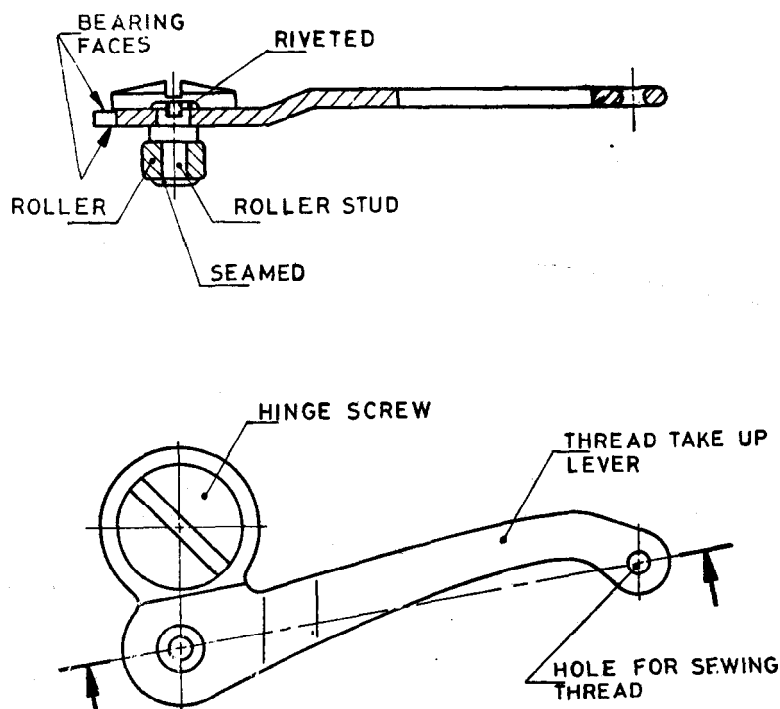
NOMENCLATURE FOR THREAD TAKE-UP LEVER SUB-ASSEMBLY
